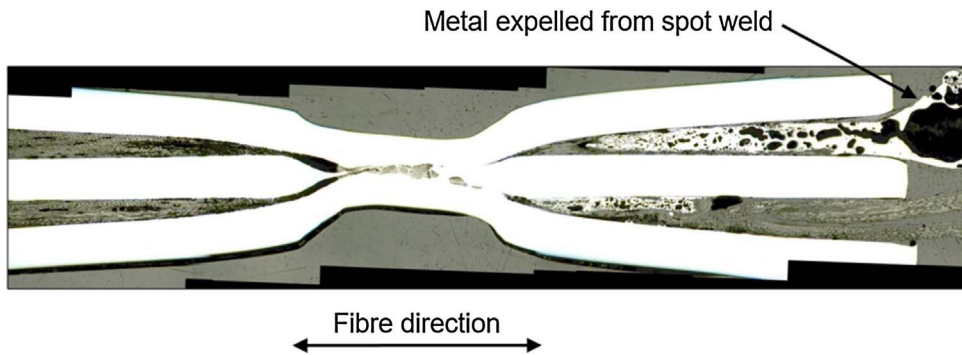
Macrosection showing flow of molten metal that has been expelled from the spot weld nugget formation region. This weld was produced with a force of 4290 N and a power of 16.6 kVA.
